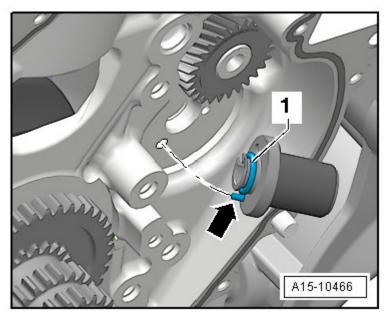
Identifying Bearing Pins - Installation Position Courtesy of VOLKSWAGEN UNITED STATES, INC.
